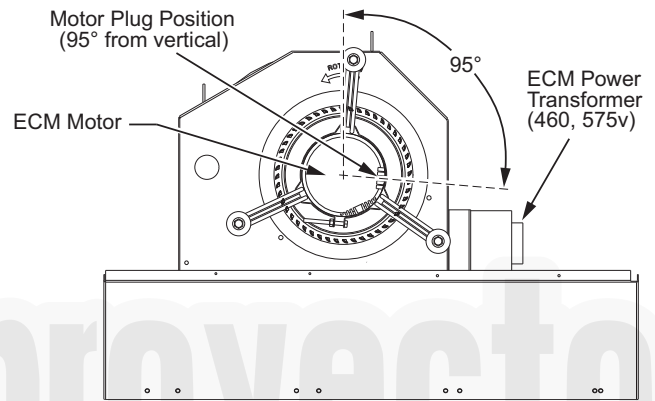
50KCQ Direct-Drive Supply Fan Assembly
